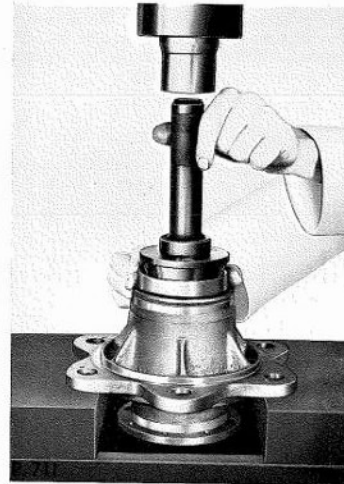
Pressing in the wheel hub inner bearing cup, using the Churchill Tool R.G.322, in conjunction with the universal handle 550
